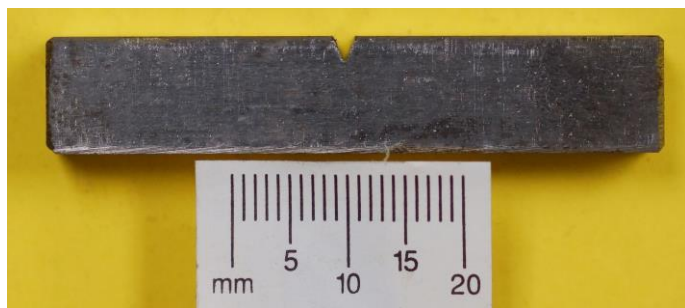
MACHINED CHARPY IMPACT TEST SPECIMEN
